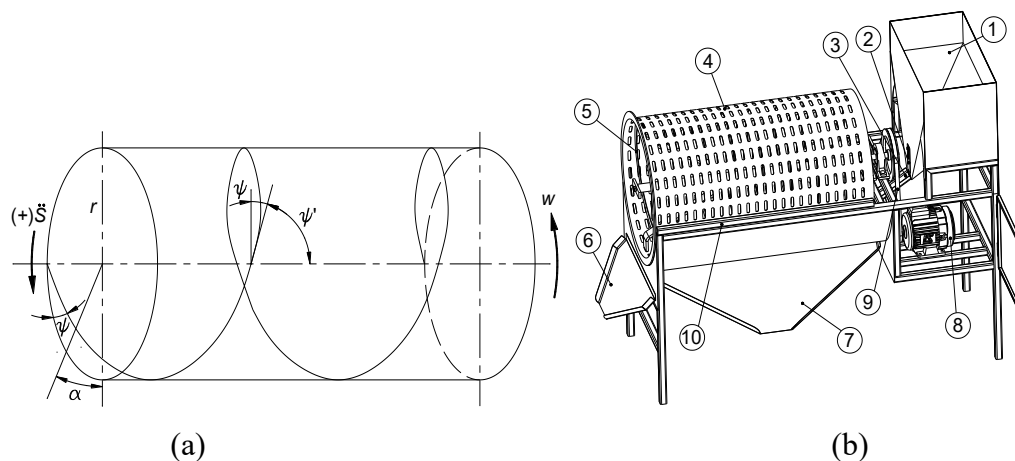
Helical path in the screen (a) and the prototype sorting machine (b): 1, store; 2, feeder outlet; 3, transport channel; 4, cylindrical sieve; 5, helical paths; 6, large kernels output; 7, small kernels output; 8, electrical motor; 9, belt pulley mechanism; 10, brush.
